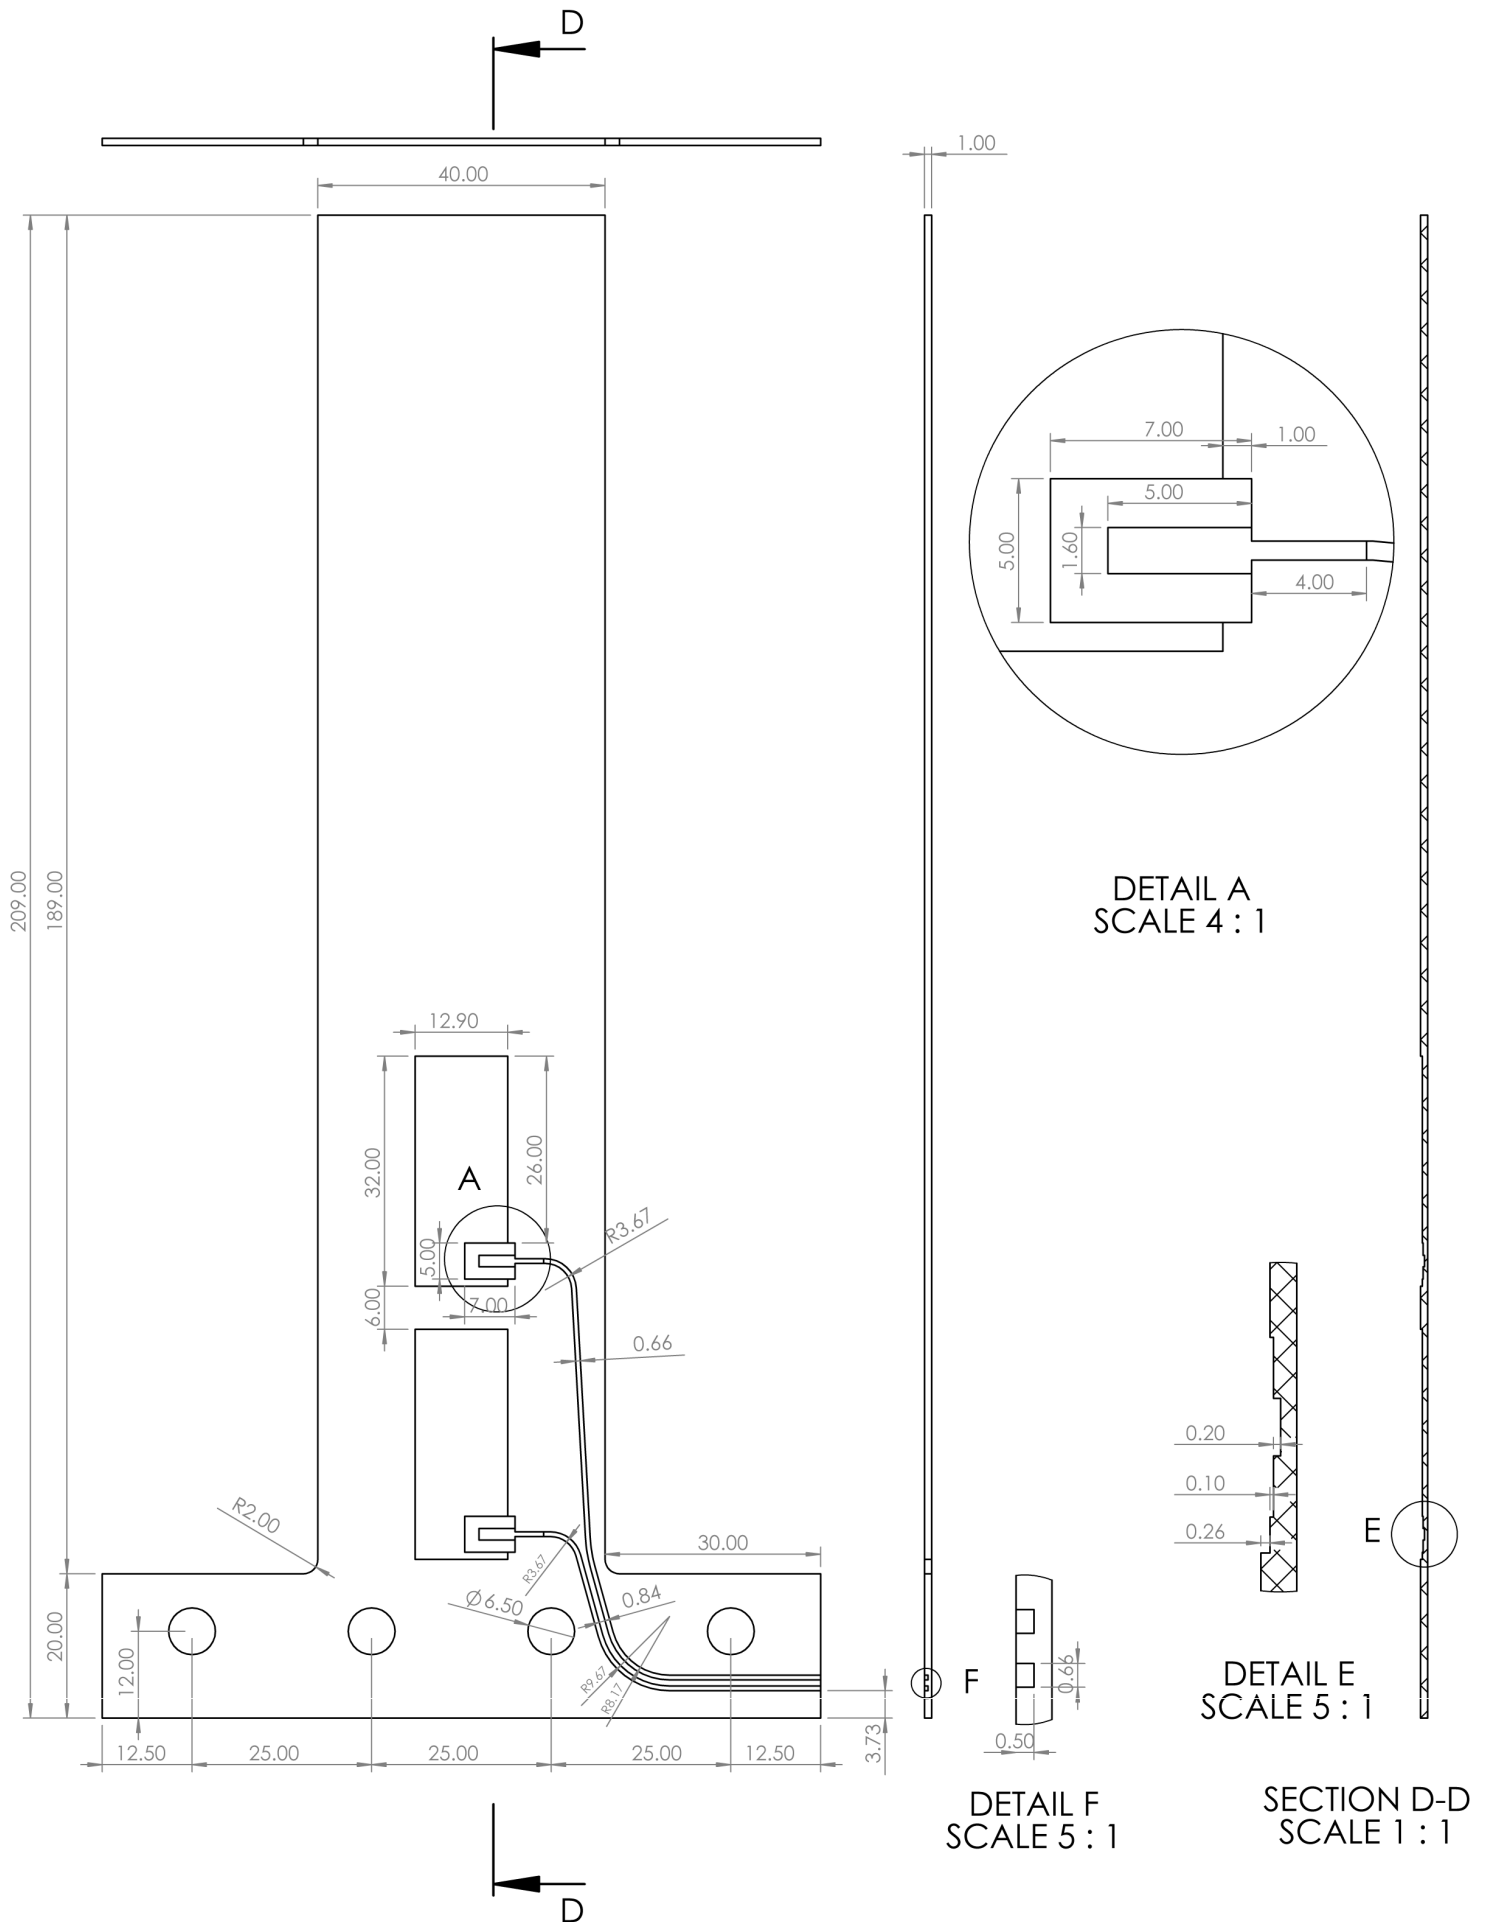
Part drawing for one half the small flexure showing all the important dimensions. Two identical half's are meant to be glued together.
